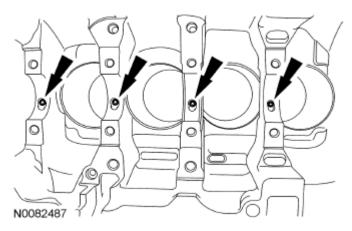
Locating Oil Squirters Courtesy of FORD MOTOR CO.
